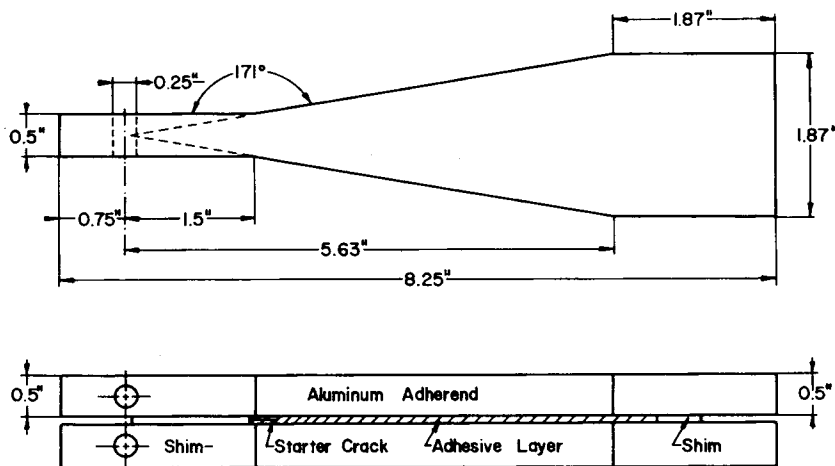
Width tapered double cantilever beam (WTDCB) specimen for mode I fracture testing.
